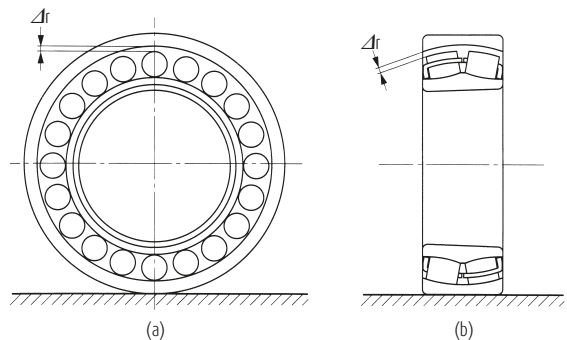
Clearance Measurement Point (Bearing Outside Diameter: Less Than 200 mm)
